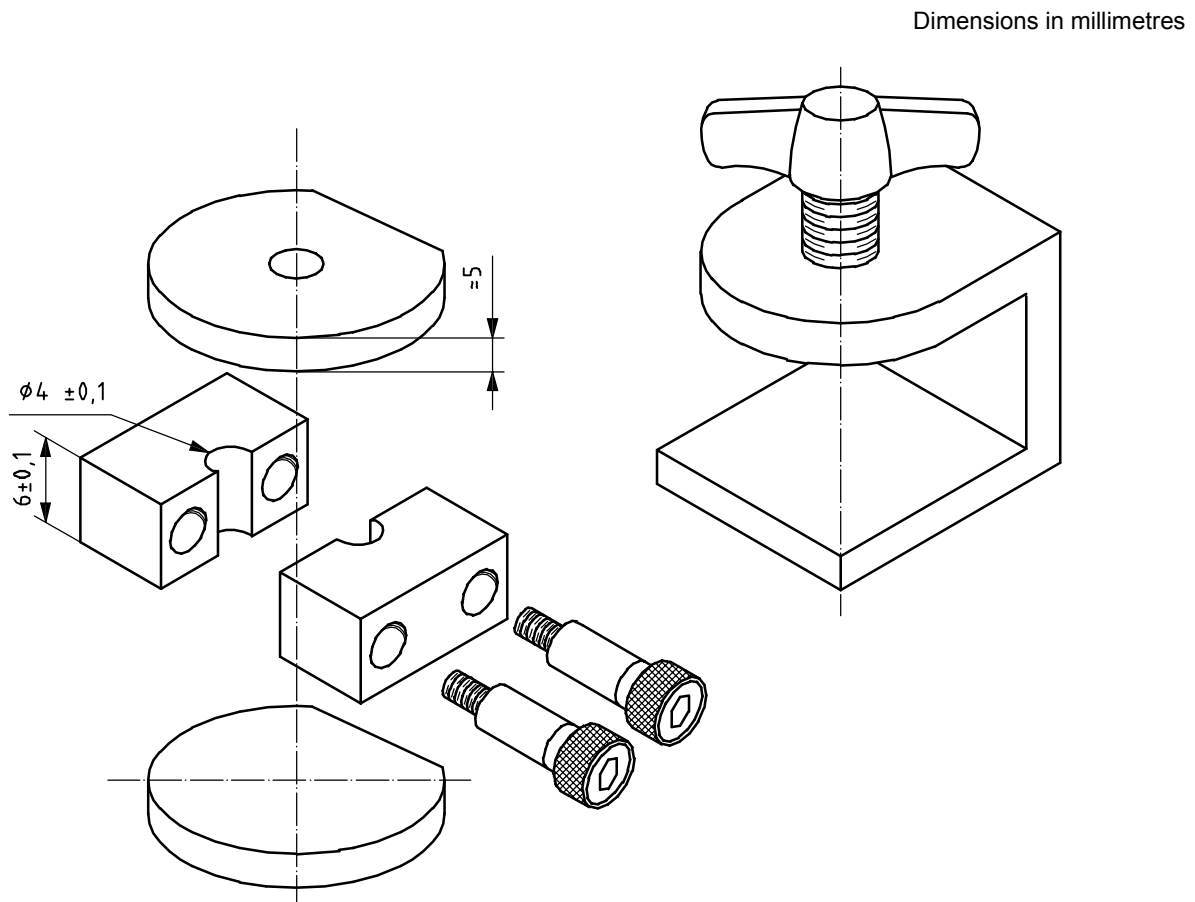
Mould and clamp for preparation of specimens for compressive strength test
